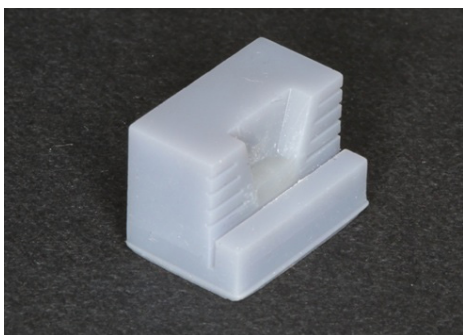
Plastic mold with a trapezoidal slot filled with the bottom horizontal layer ~ 1 mm.
